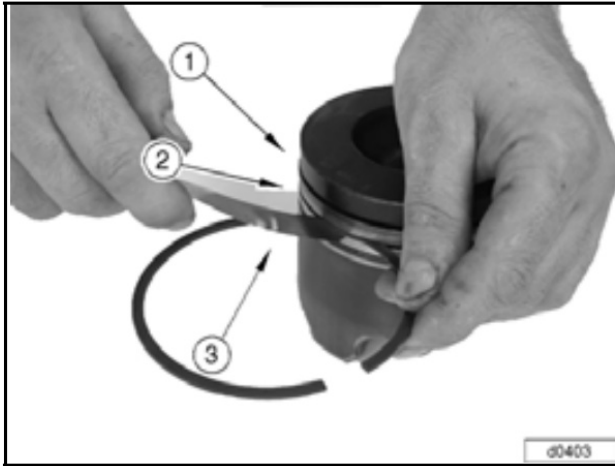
Checking Side Clearance Of The Intermediate Ring And Oil Control Ring Grooves
